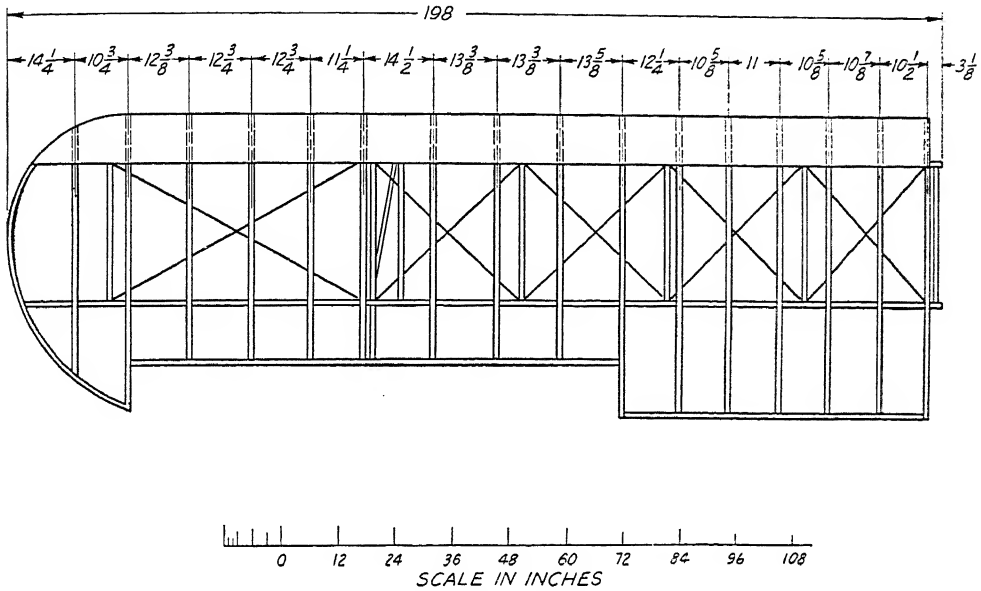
Rib Spacing Layout. Prob. 12-4.
